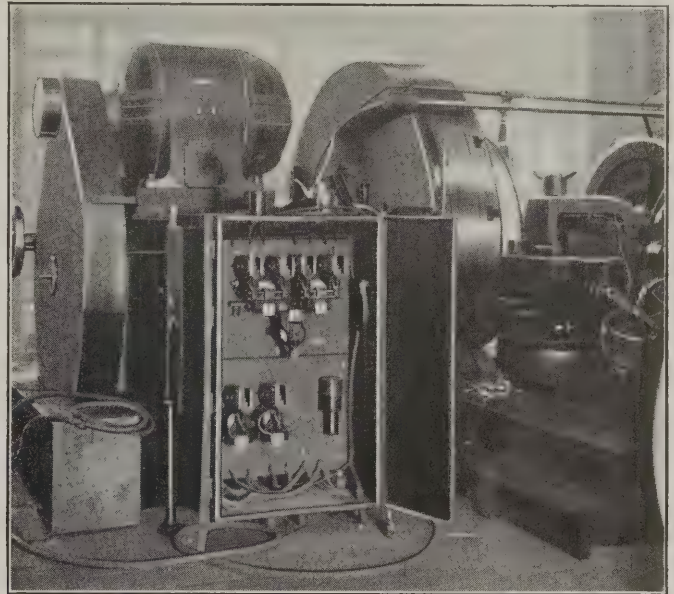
Large Wheel Lathe With General Electric Automatic Control Panel
